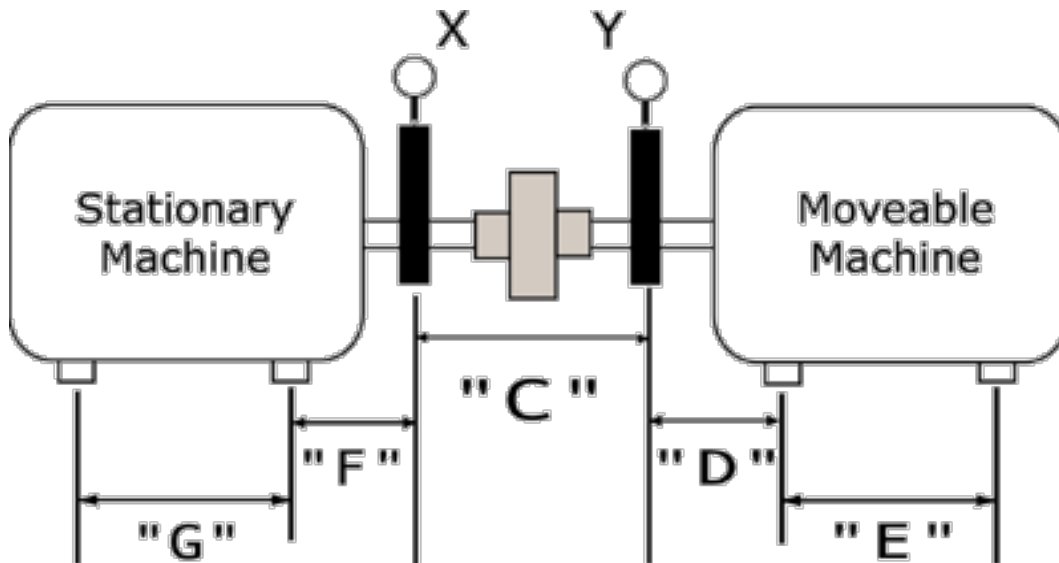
Use this figure for determining reference measurement points when performing the Reverse-Indicator method of shaft alignment. Alignment kit setup instructions are not available for this method of shaft alignment. Peterson brand alignment kits are based on the Rim-and-Face method (figure 5).
